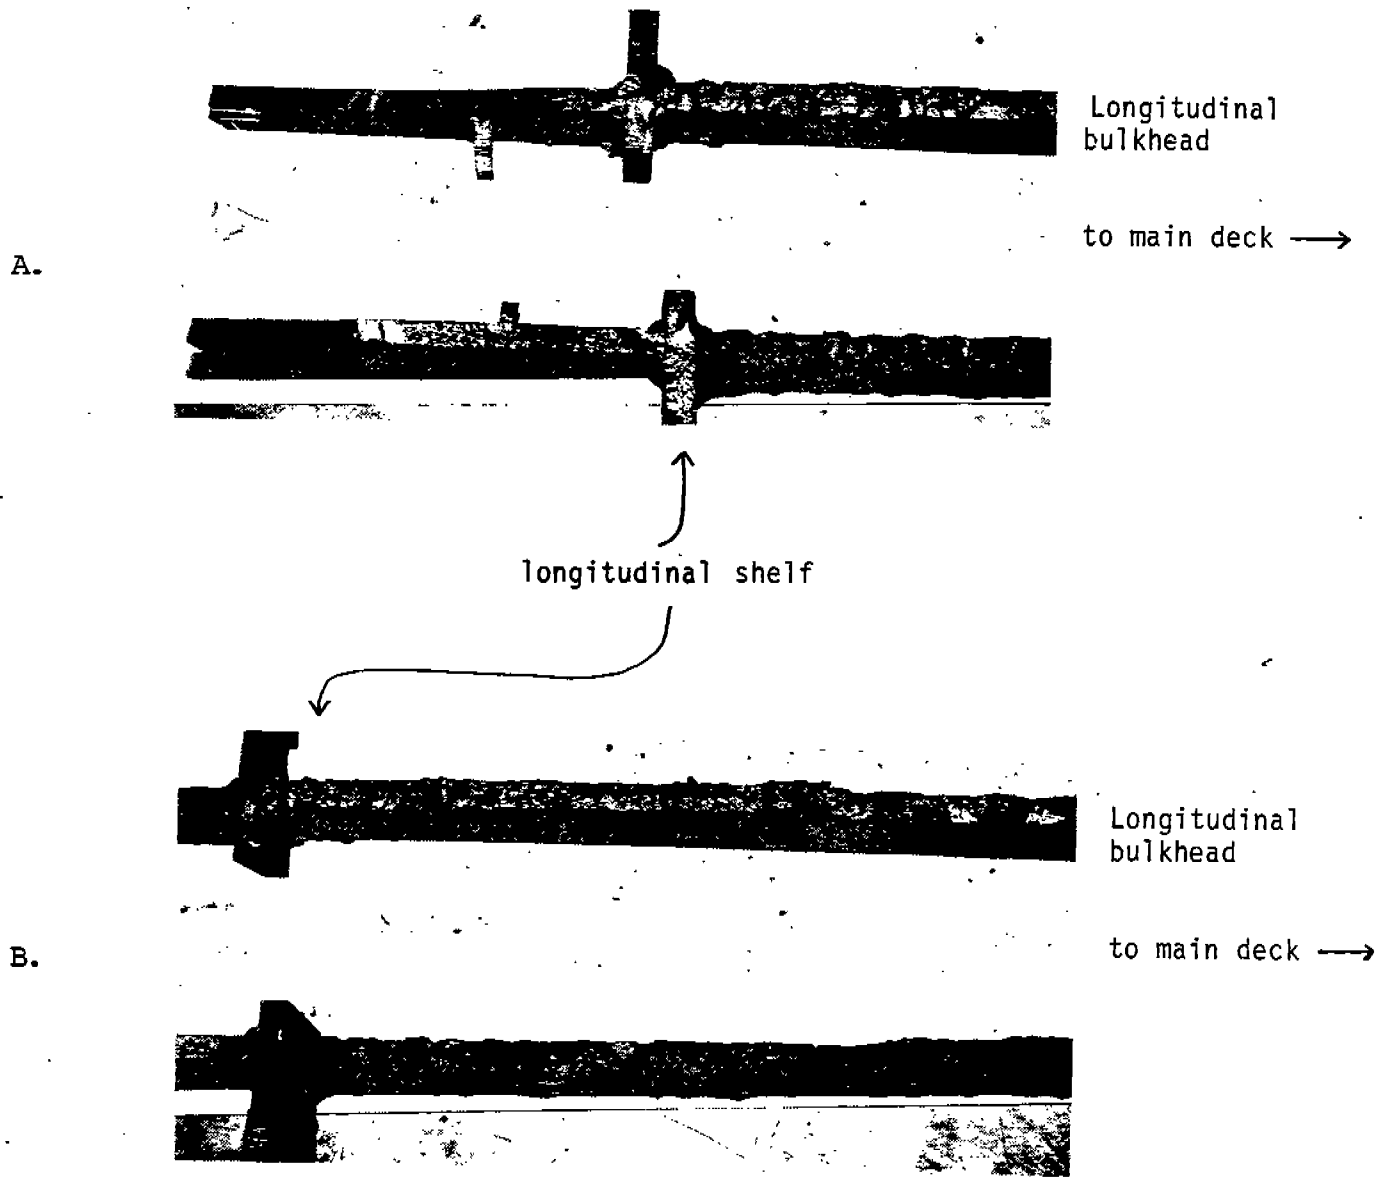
Details of the 123,000 DWT Tanker Fracture Surface
